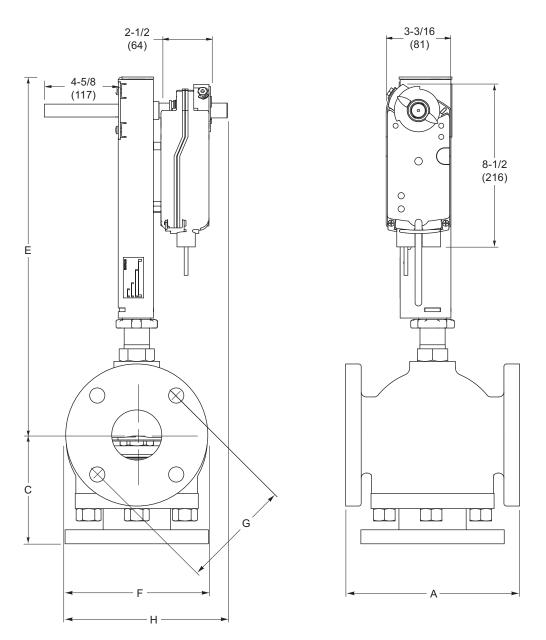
Mx41-6153 with 2-1/2" to 4" Flanged 3-Way Globe Valve With AV-607-1 Linkage.
